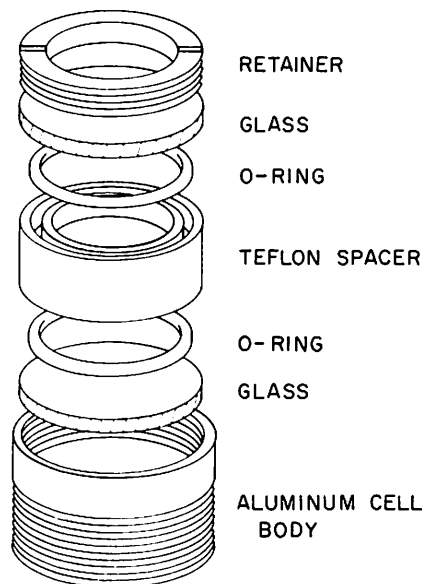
Liquid-filter cell that has been successfully used in varying environments. The external threads are for mounting in a filter wheel. (Drawing by Ruth Pellicori.)
